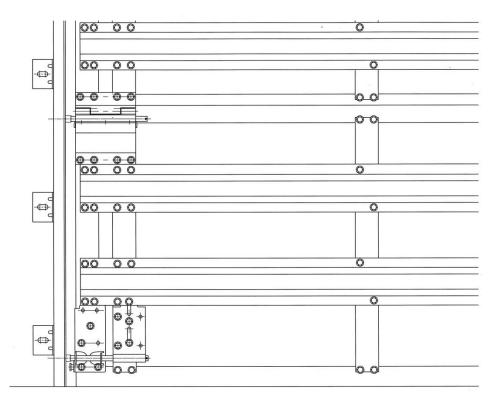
Bottom Brackets, Adjustable Side Hinge & Strut Fixing Positions (Bottom Panel shown).
